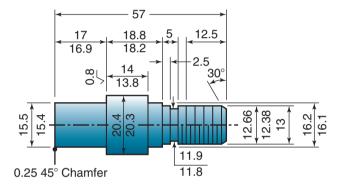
A machined and threaded part, showing various dimensions and tolerances; all dimensions are in mm. Note that some tolerances are only a few tenths of an mm.
